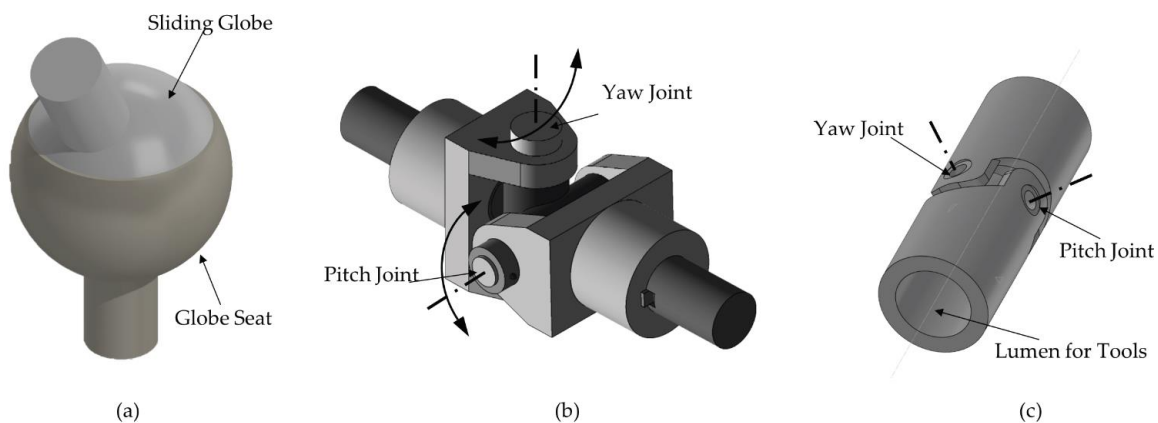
General types of joints used in multi-link backbone TDCRs. (a) Globe joint/spherical joint, (b) cross-universal joint with the joint located at the middle line, and (c) cross-universal joint located peripherally, allowing a passage to take signal cables through.
